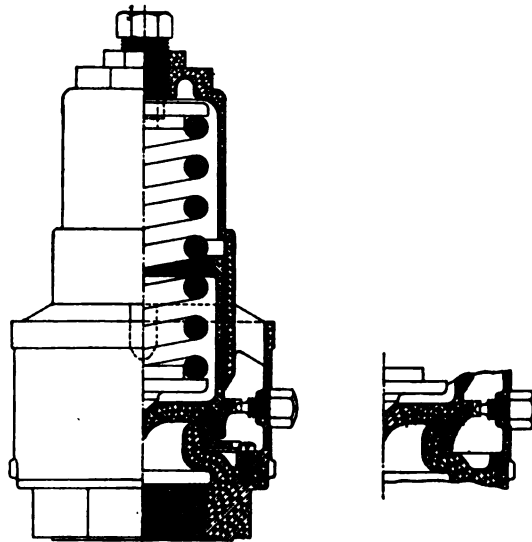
LOCOMOTIVE VALVE OF APPROVED DESIGN
